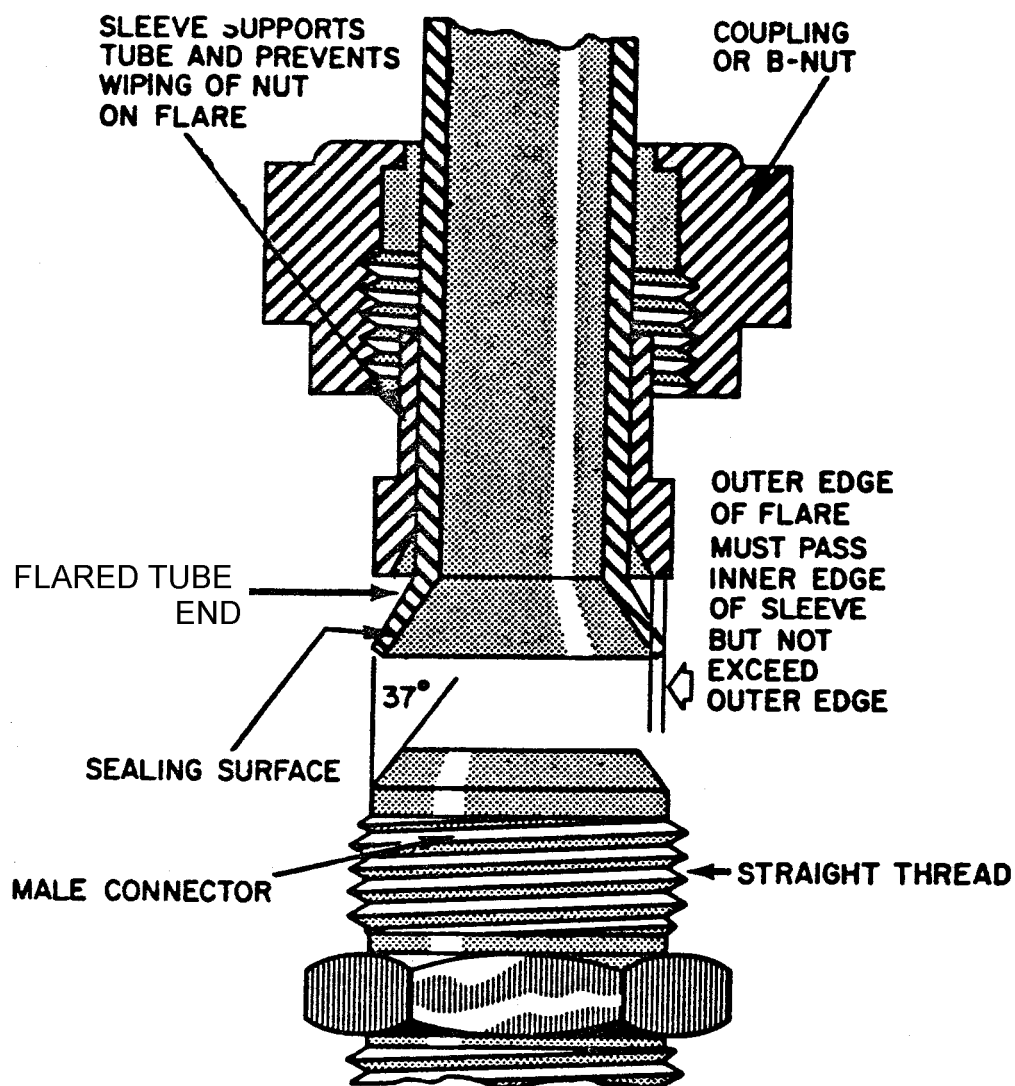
Three-Piece 37° Flared Tube Fitting Connection, Disassembled
